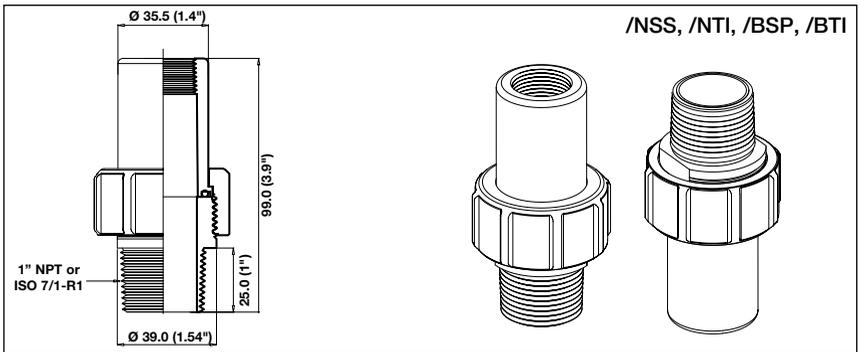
Dimensions 1" FU20 adapter Stainless Steel & Titanium
